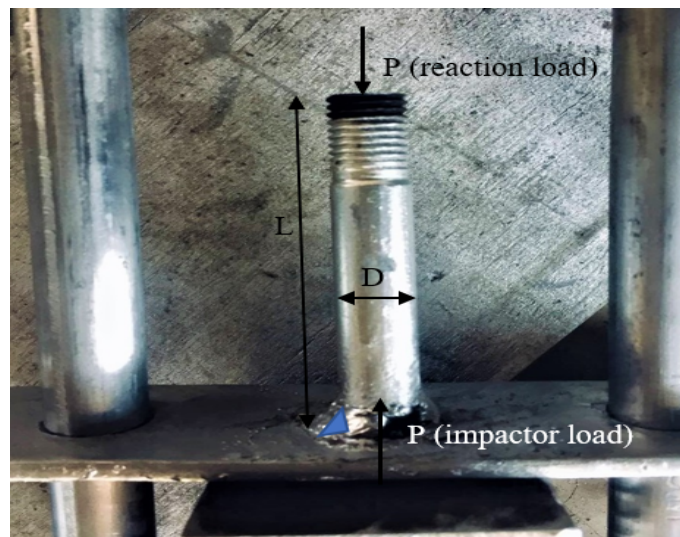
Circular fillet Weld at the striker shaft
